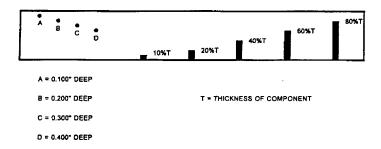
C-1 Typical Calibration Block for Crack Sizing
